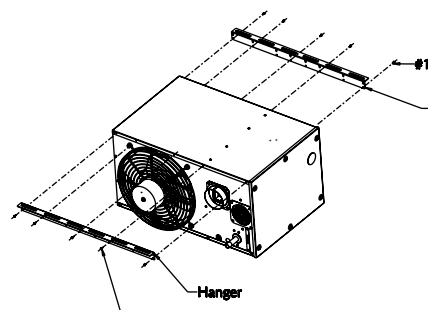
A – Low profile tubular units – 30/120 MBH sizes (*Hanger bracket installation instructions)
